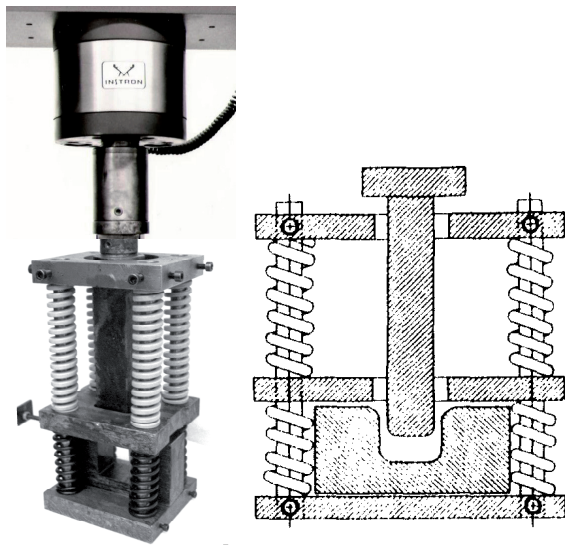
Experimental stamping apparatus and schematic drawing detail of system
